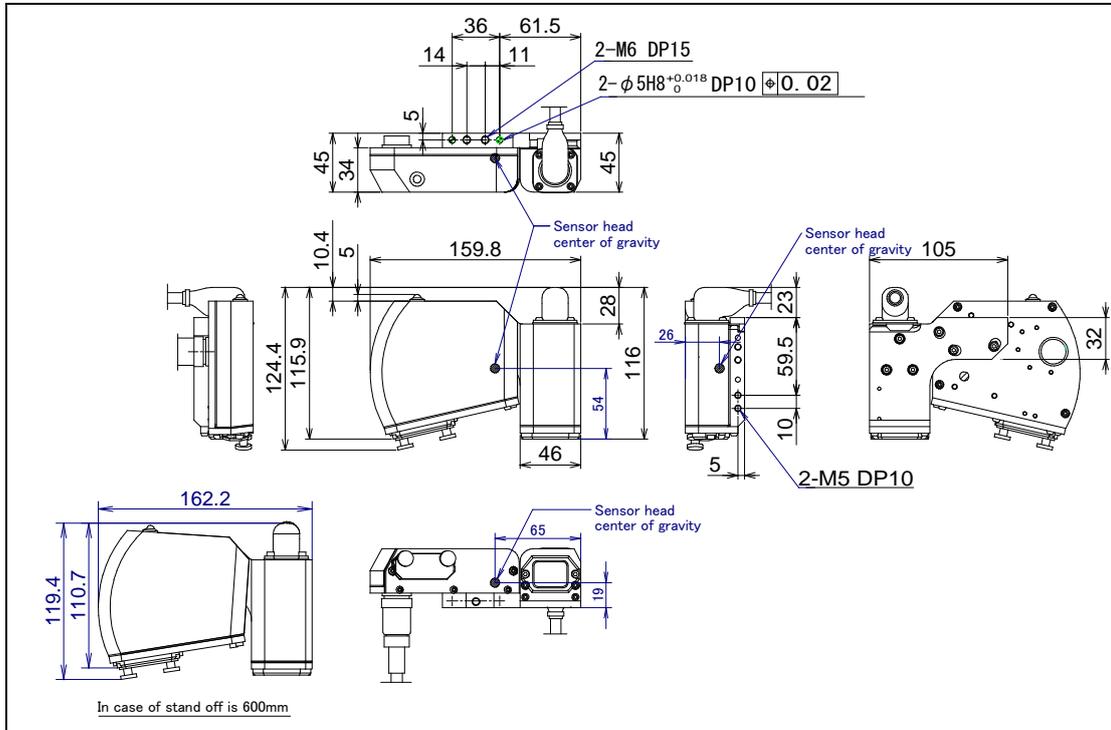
(a) External dimension of the 3D Laser Vision Sensor Head
